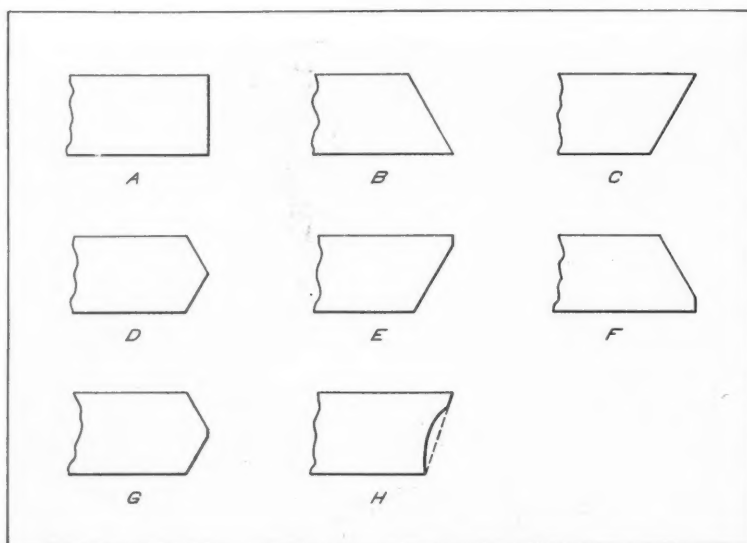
Typical edge profiles produced on plates in preparation for production welding. These butt-joint edges progress from the simple square edge seen at (A) to the more complex single J edge shown at (H)
